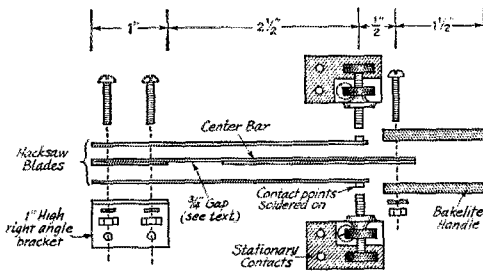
Details of the key lever. The stationary contacts are adjustable contacts removed from an old relay and mounted on small blocks of bakelite. The whole key lever is mounted directly on the base plate of the unit.
